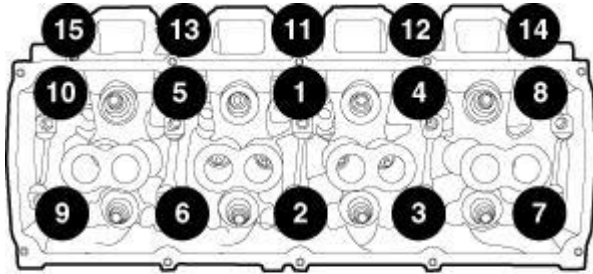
Cylinder Head Bolt Removal & Tightening Sequence
